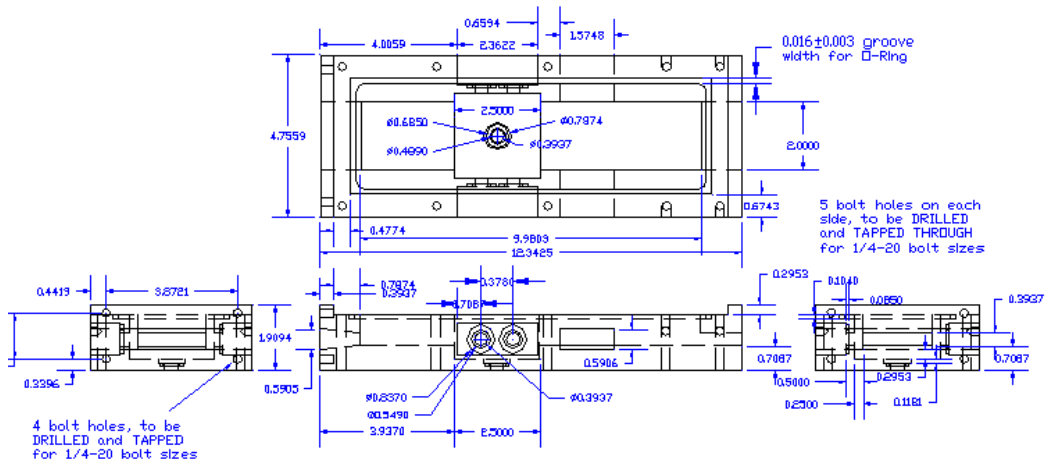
Drawing of the plasma assisted combustion test section (dimensions are in inches)
